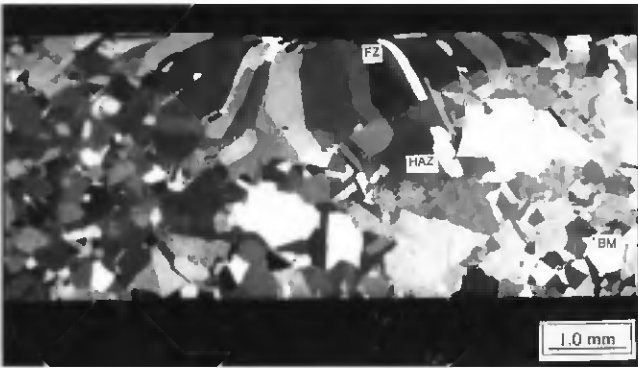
The shape of the fusion zone of a Ni-270 GTA weld at 10 g.
